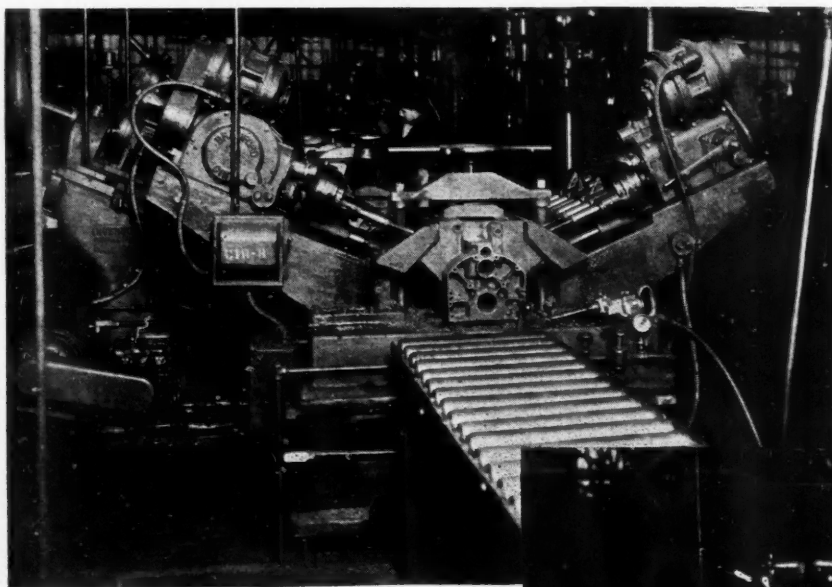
(left)—Drilling cylinder bolt holes. This machine consists of an Ingersoll base with specially adapted Bradford heads
